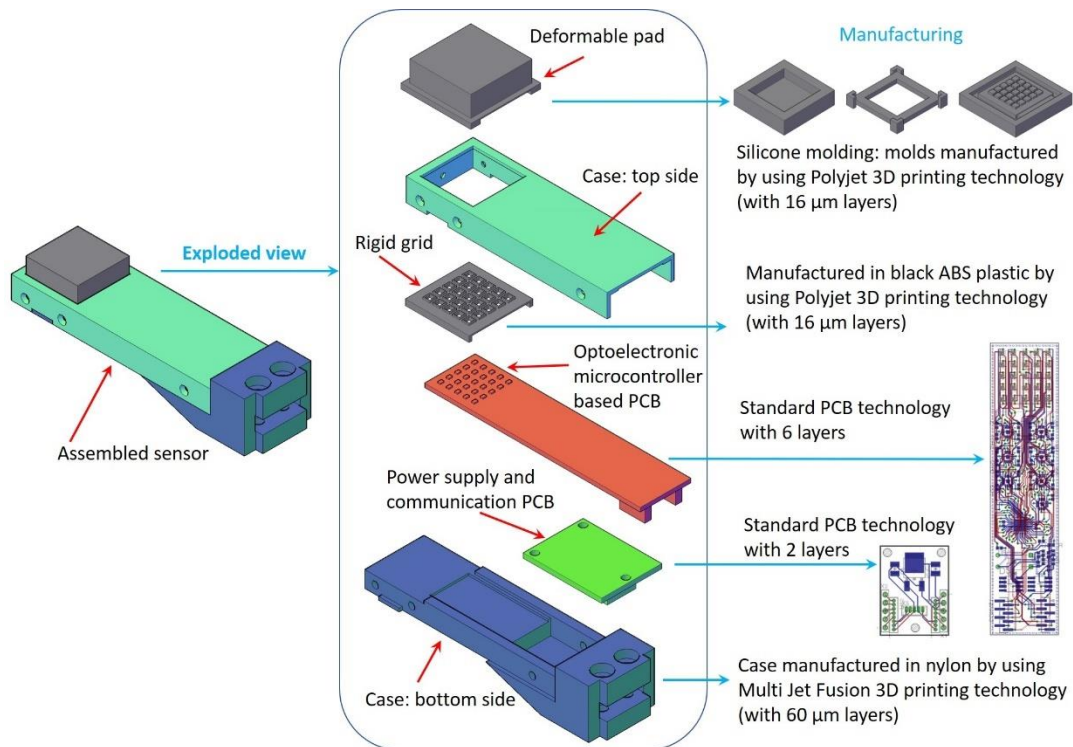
CAD drawing of an assembled sensor (left) with all components (middle) and details about 3D machines used for the production (right).
